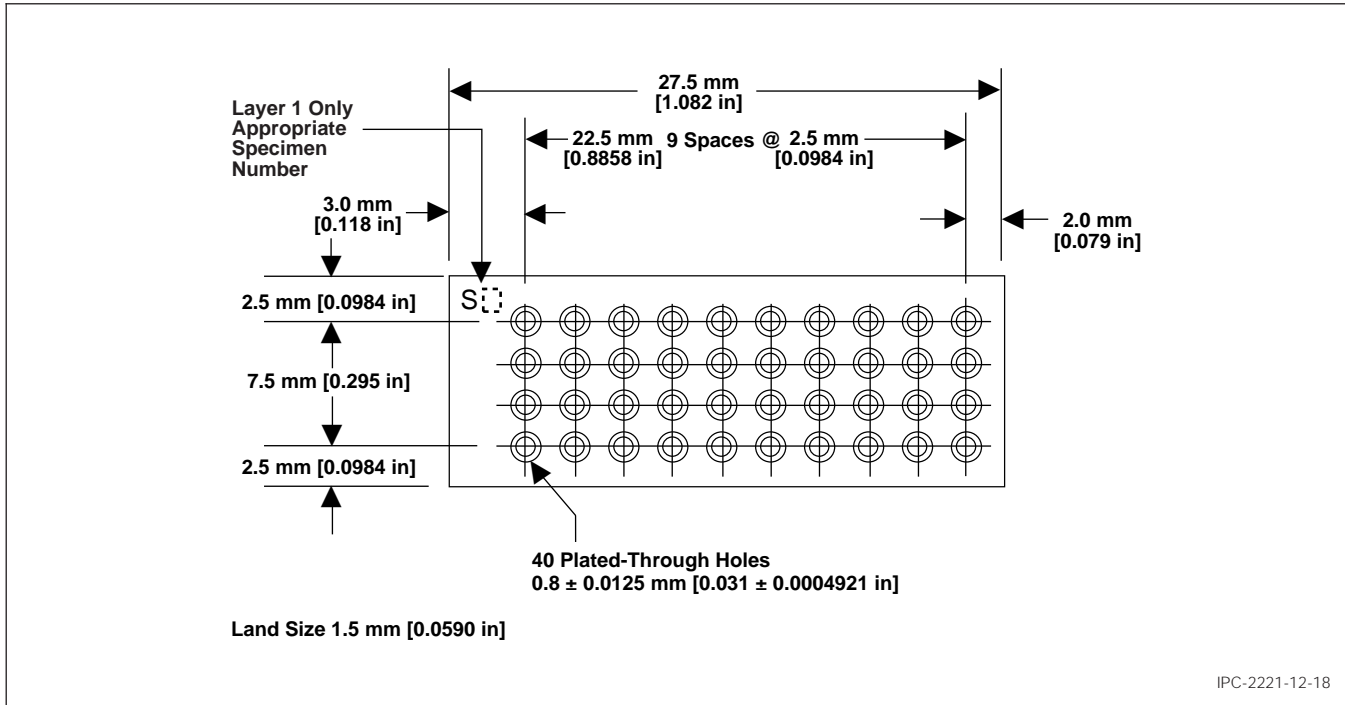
Suggested Test Specimen for Plated-Through Holes
